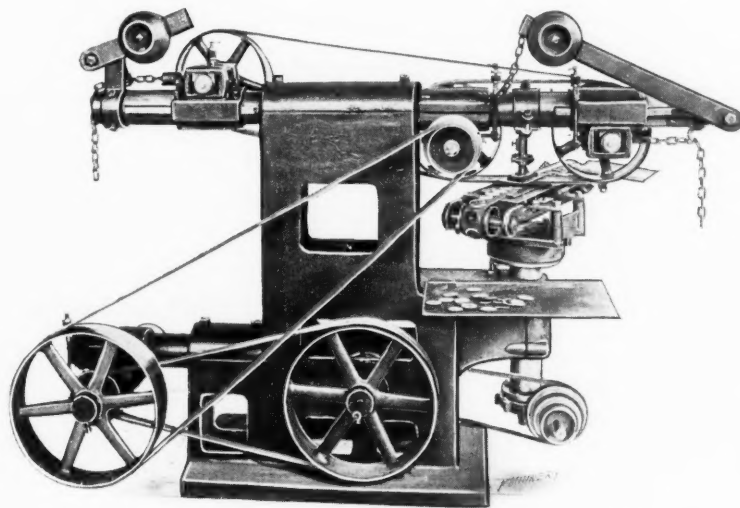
Rear View of Machine, showing Drive and Tension Mechanism
